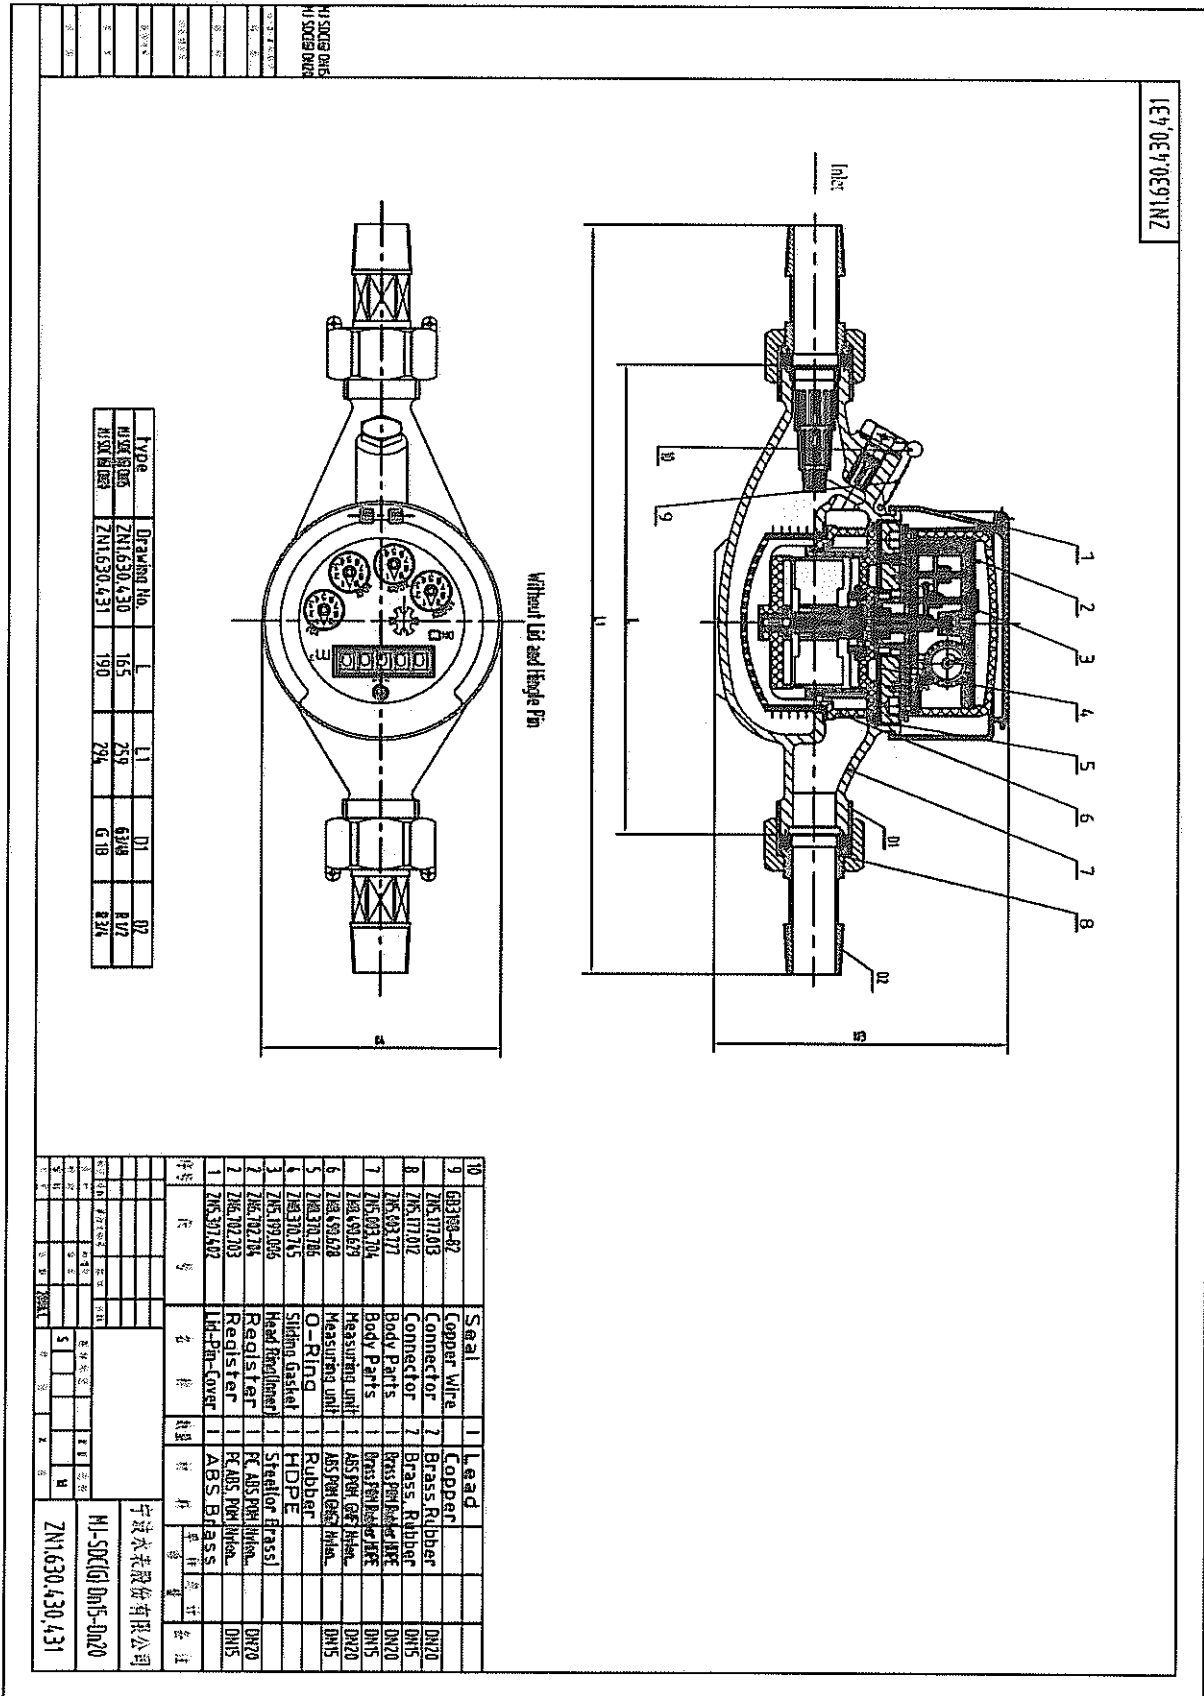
The water meter type MJ-SDC (Z) assembly drawings:
